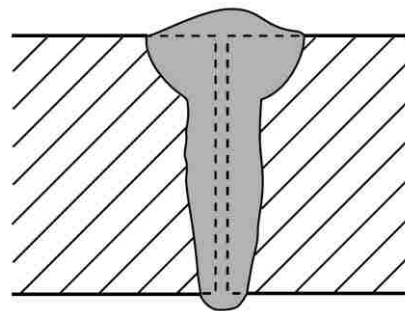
Schematic diagram of cross-sectional shape of keyhole mode laser welding bead [3]
